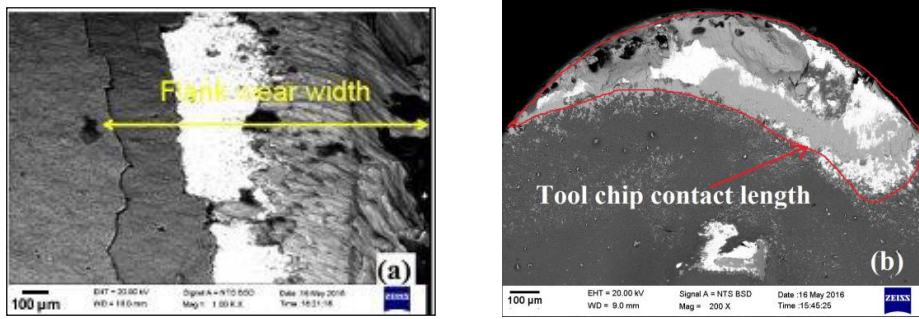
SEM images (a) flank wear width; (b) tool-chip contact length.
